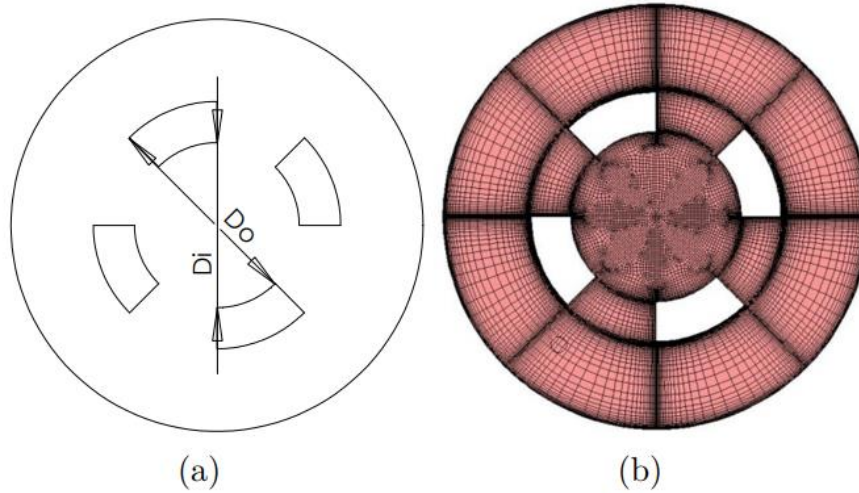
(a) Drawing of the rotor disk with the holes ( $D_i = 60 \text{ mm}$ ,  $D_o = 90 \text{ mm}$  &  $D_{rotor} = 150 \text{ mm}$ ) (b) Surface mesh of the rotor disk with the holes, [26]
